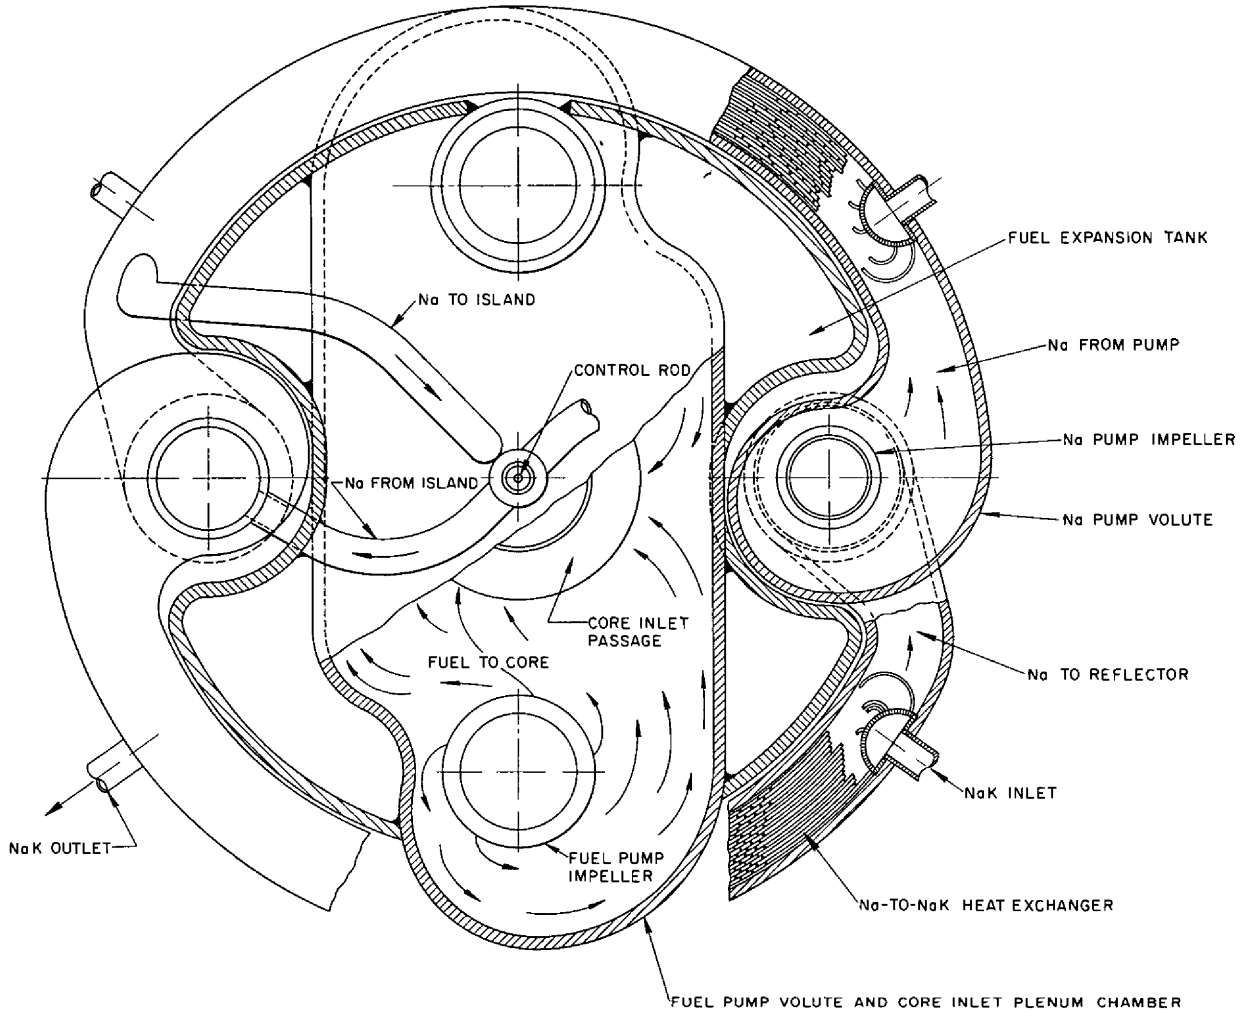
Cross Section Through Pump and Expansion Tank.
